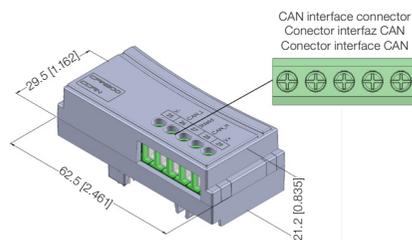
CFW300-CCAN dimensions in mm [in] and connectors location
